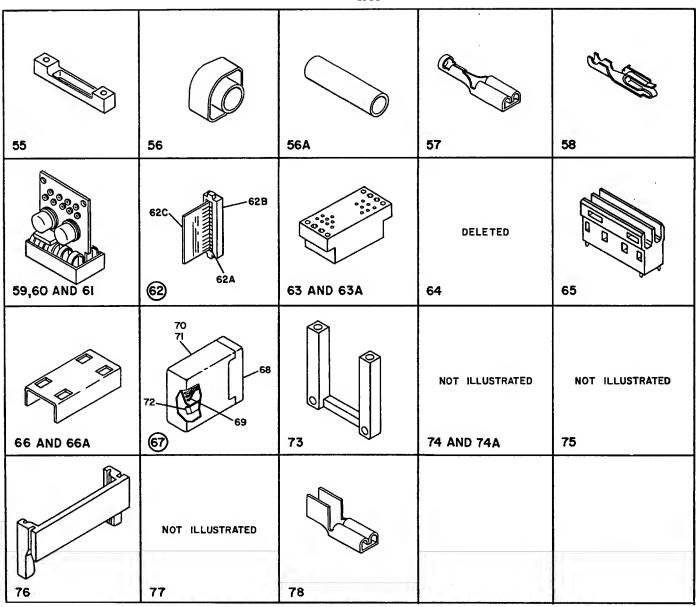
CABLE AND JUMPER ASSEMBLY COMPONENT PARTS. SHEET 3 OF 3. SEE LIST 19.
